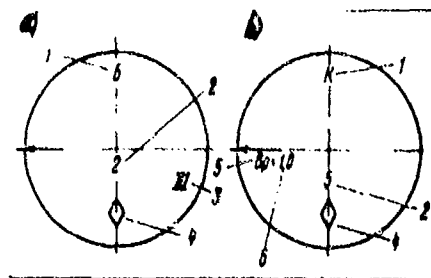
Piston marking: a) nominal dimension b) overhaul dimension 1) dimensional group according to skirt diameter 2) dimensional group according to weight 3) dimensional group according to wrist pin hole diameter 4) location of DTC stamp 5) designation of piston overhaul group 6) overhaul dimension of piston
